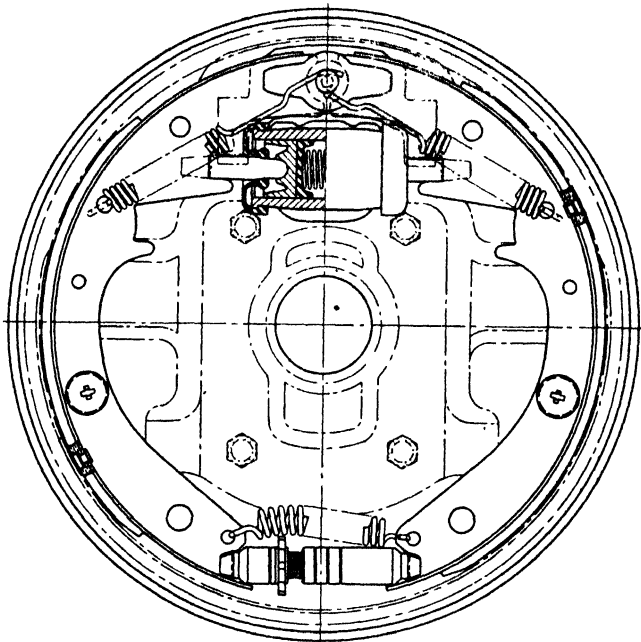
BENDIX DUO-SERVO BRAKE.
